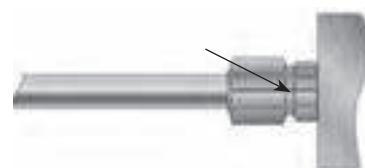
For initial assembly only, tighten by number of flats recommended in Table R23. Make a second reference mark on fitting body, lined up with mark on nut; 1 FFWR shown. See page R26 for reassembly procedure.
